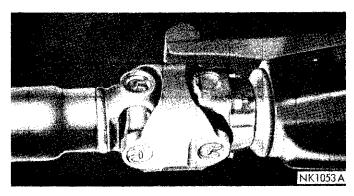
Rear Constant Velocity Universal Joint stalling, install in same manner as propeller shaft was removed.
